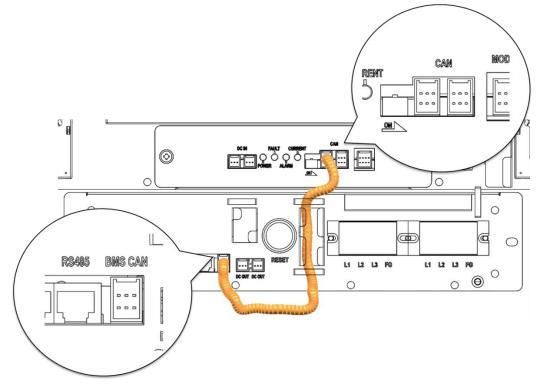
CAN Signal Cable Connection from SMPS Assembly to Switchgear
